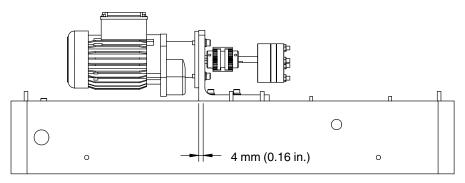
Moving the motor assembly back 4 mm (0.16 in.)
